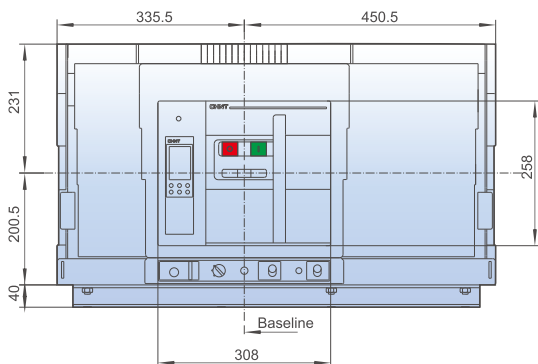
Overall dimensions of NA8-7500 3-pole withdrawable type (In=4000A~6300A)
